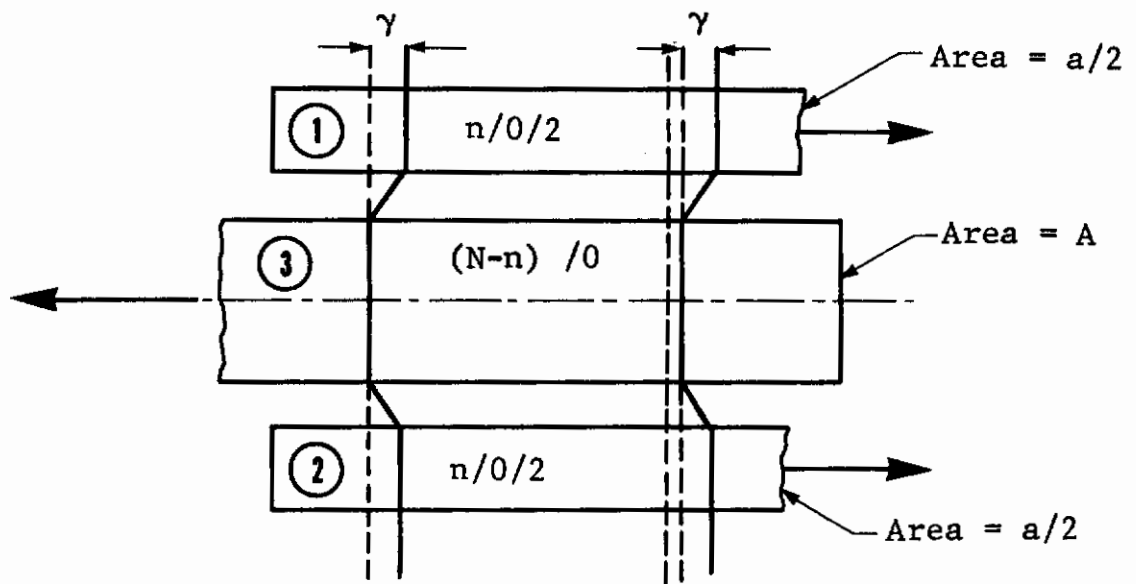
IDEALIZED RIVETS OR BOLTS FOR DOUBLE LAP RIVETED JOINT
